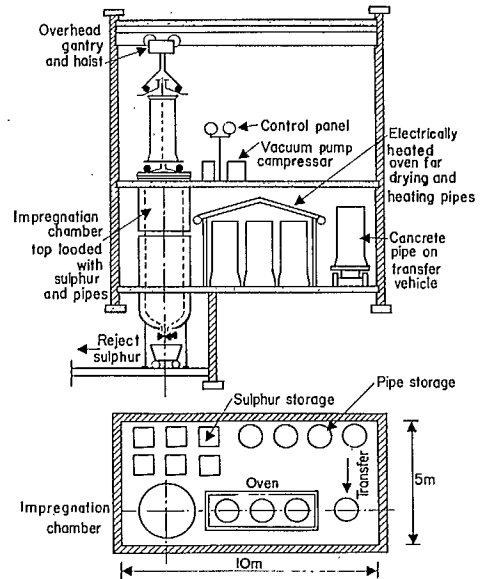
Layout for the infiltration of concrete pipes; from reference 60
